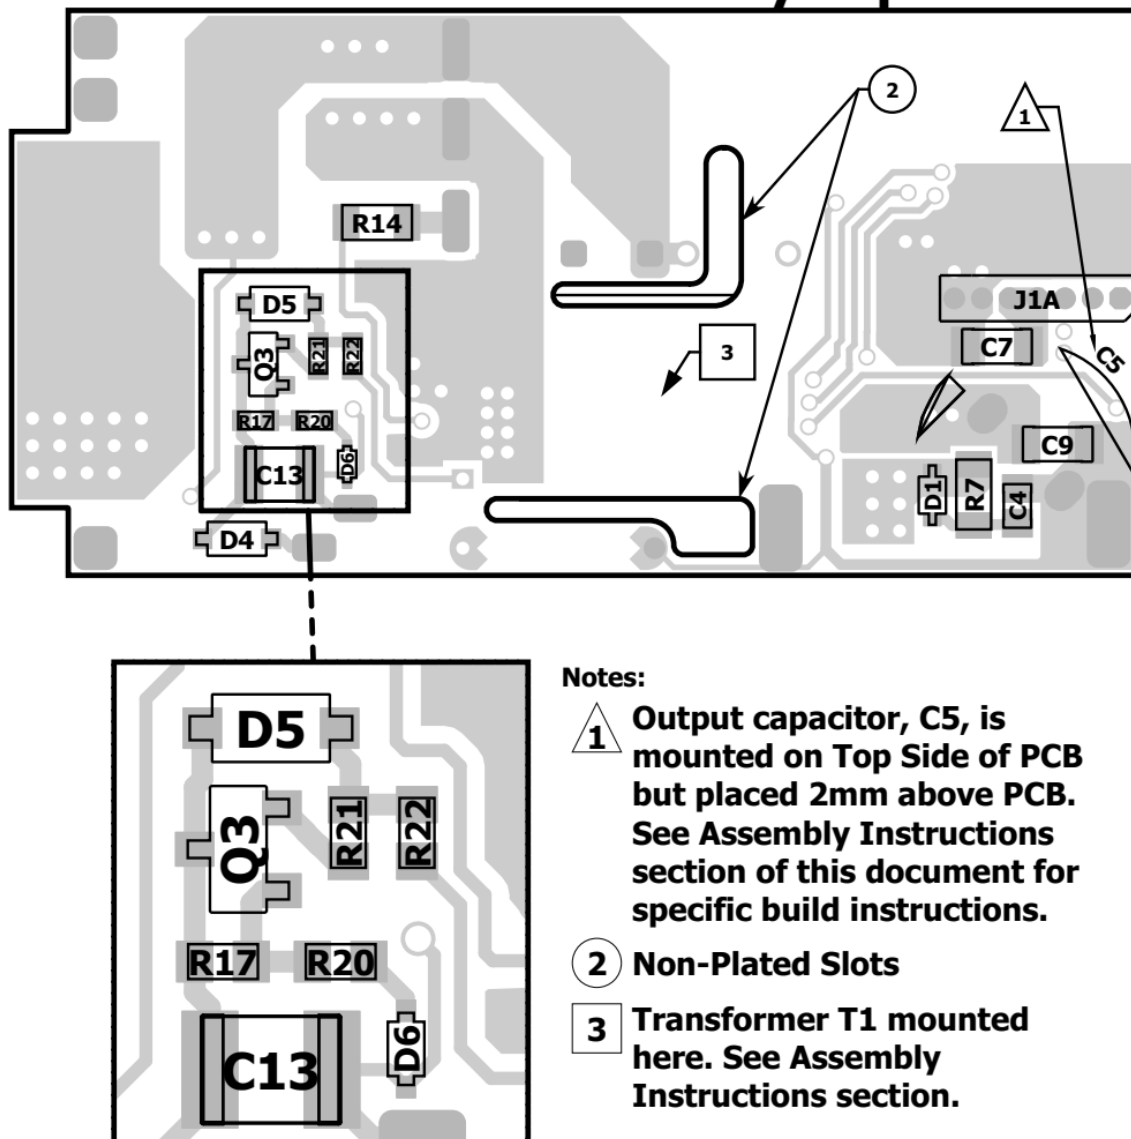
DER-822 Rev B Main Board Assembly Top.
